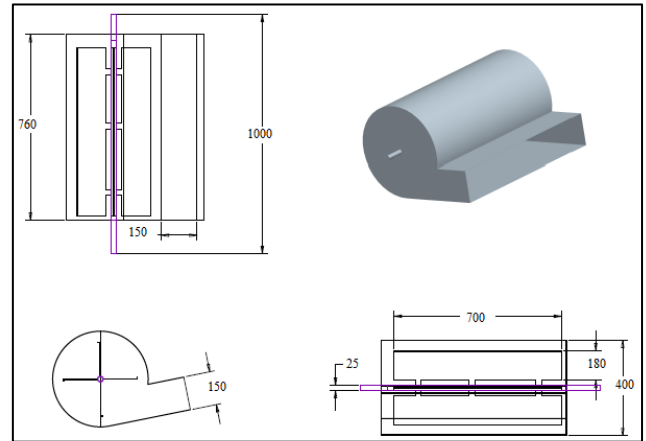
Front, Top, Side & Schematic View of Blower of Developed Thresher
